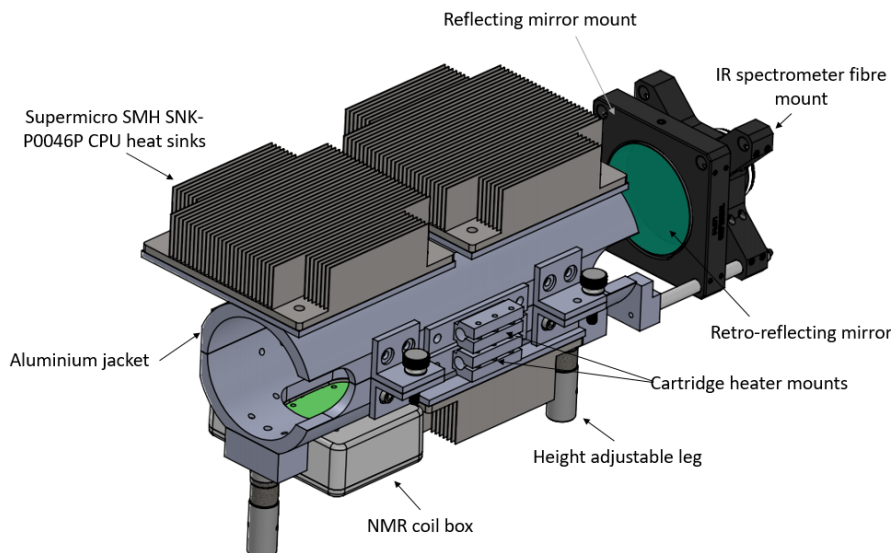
Labelled CAD drawing of the N-XeUS2 jacket
